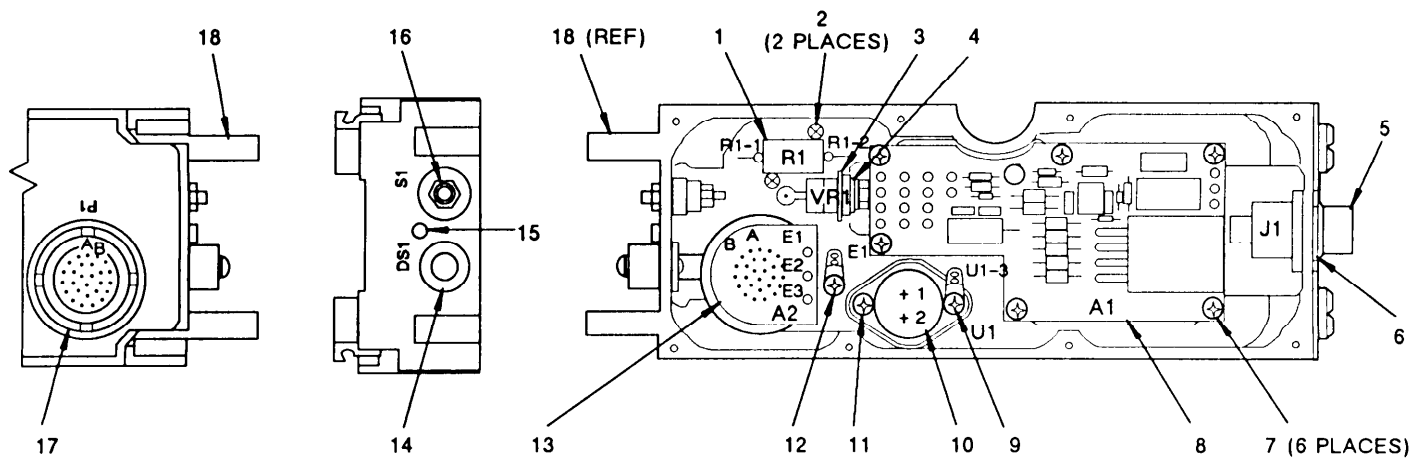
Battery Tray Subassembly (Front, Bottom, and Right Side Views) With Mounting Plate Assembly.
